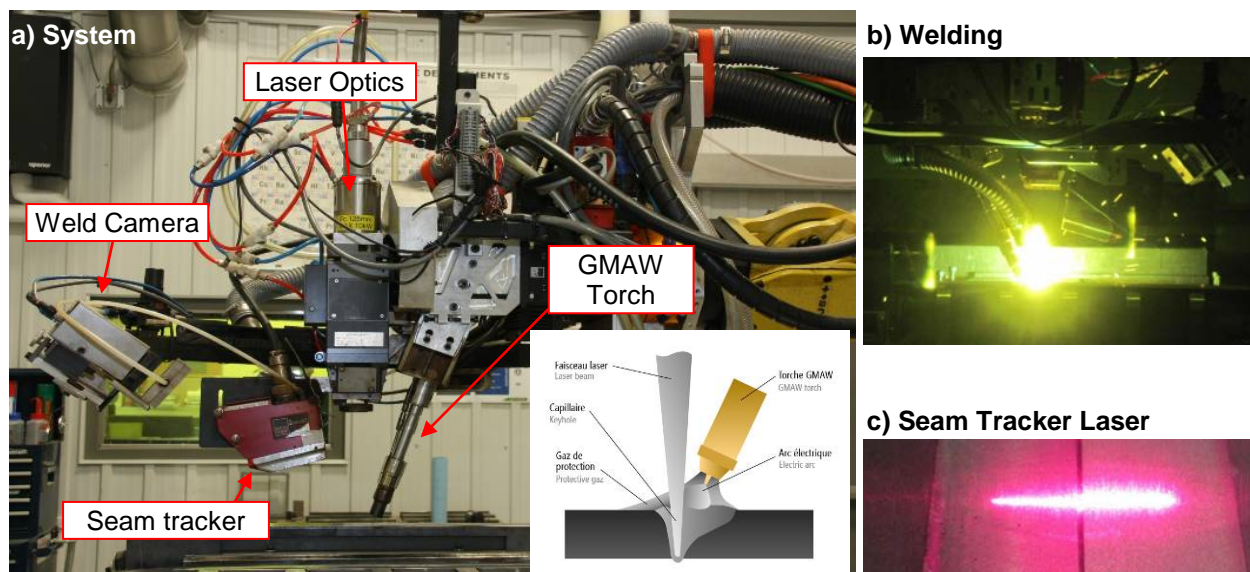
Novika Solutions' Hybrid Laser Arc Welding (HLAW) System
